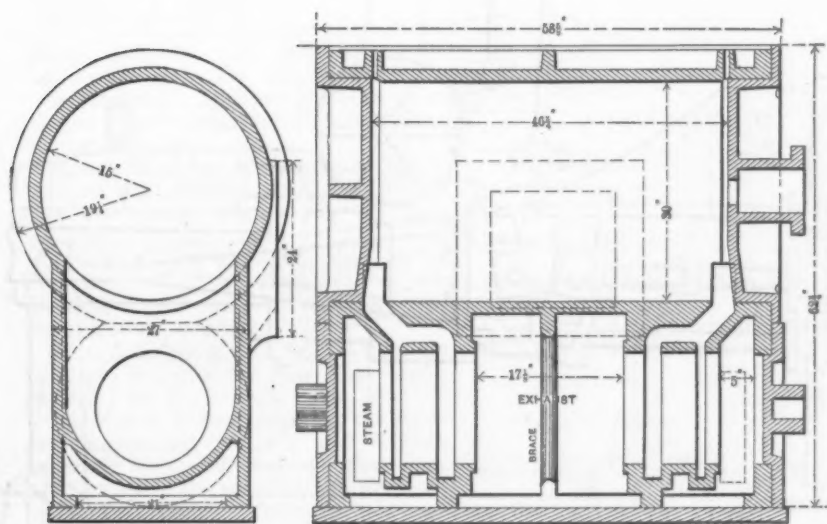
Cross Section and Sectional Plan through Cylinder.
